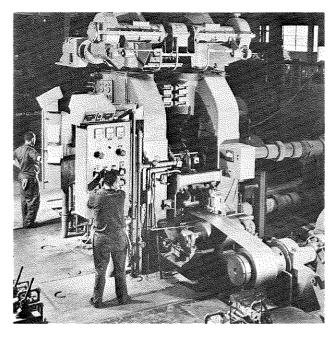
A 4-High Cold Rolling Mill in Operation.
